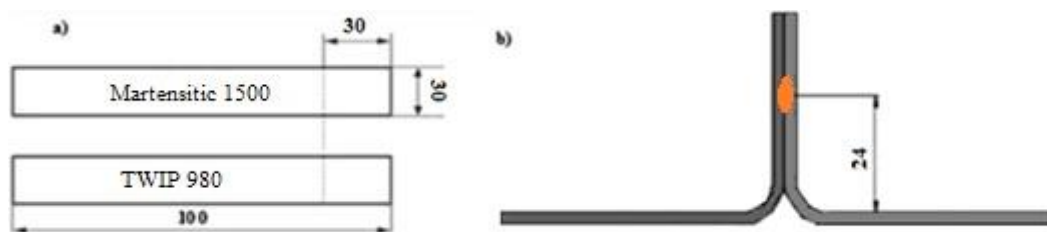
a)Dimensions b) Welding position of Tensile-peel specimens
